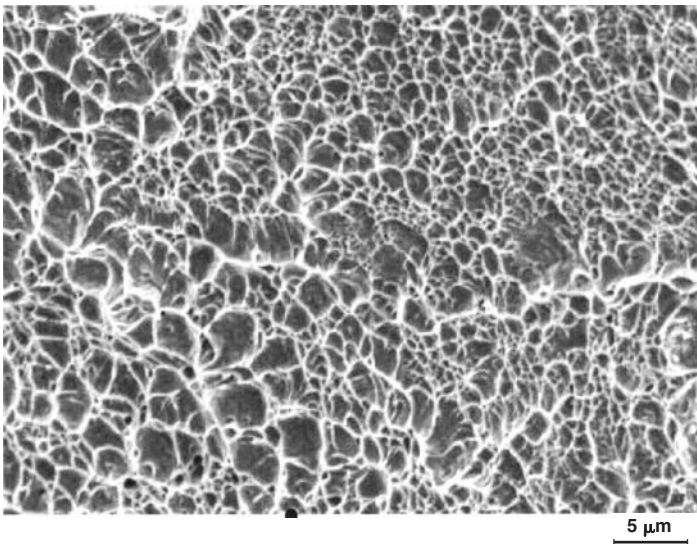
SEM fractograph of the bolt shown in Fig. CH6.3, showing dimples typical of overload fracture
